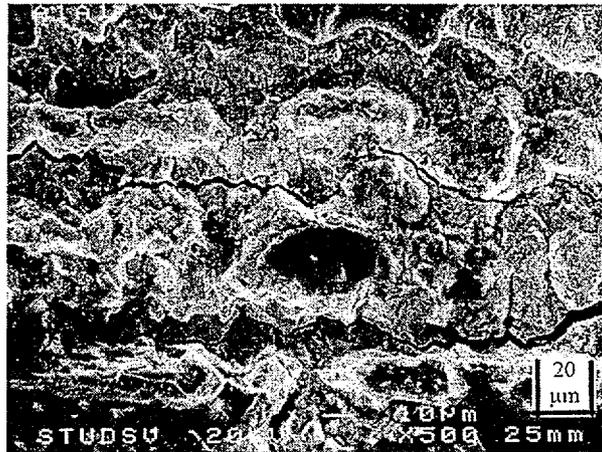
Detail of fracture surface in Boat Sample A showing interdendritic cracking. Note the transverse cracking.
